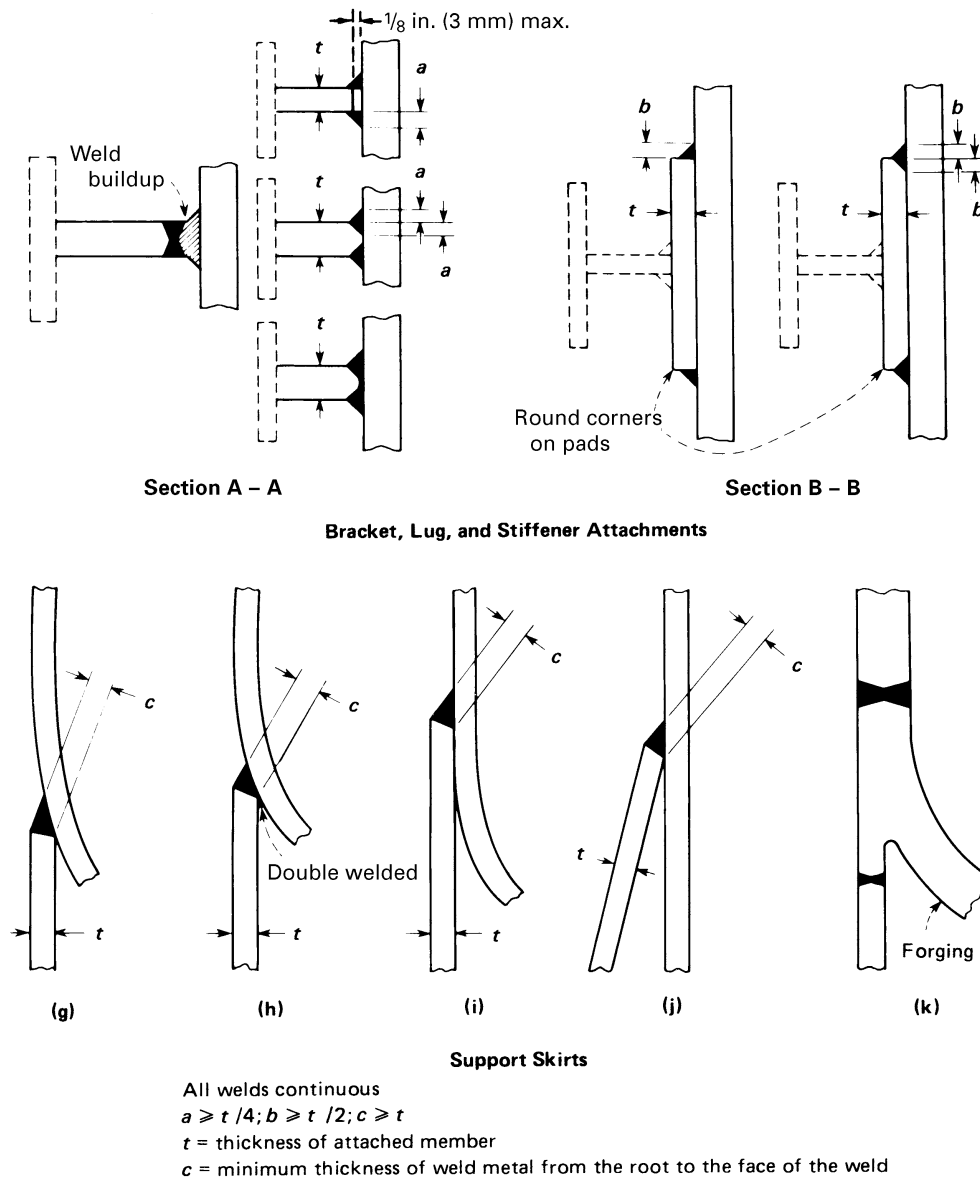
SOME ILLUSTRATIVE WELD ATTACHMENT DETAILS AND MINIMUM WELD SIZES (CONT'D)
